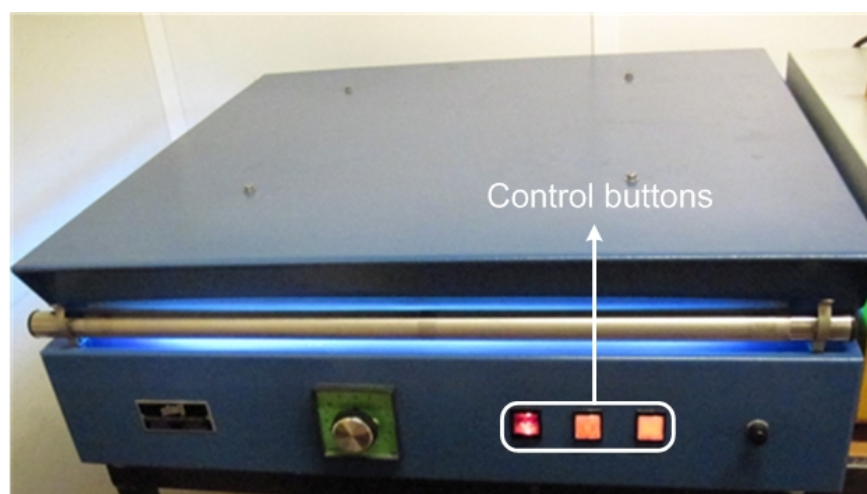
A UV exposure machine typically used for fabricating PCBs.
